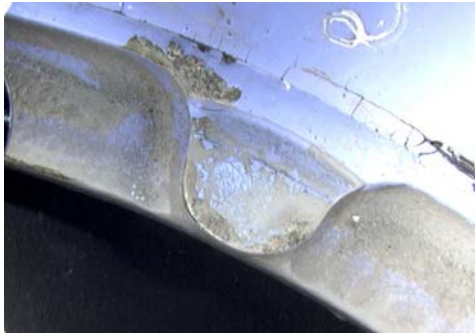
Aft/upper hinge pin, cotter pin is broken.
